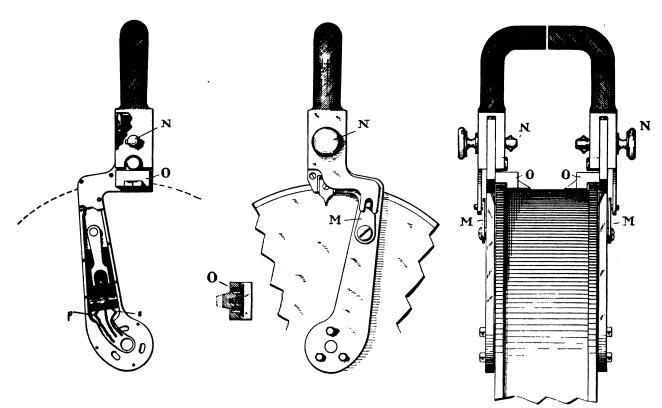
TRANSMITTER HANDLE OF ENGINE TELEGRAPH.
